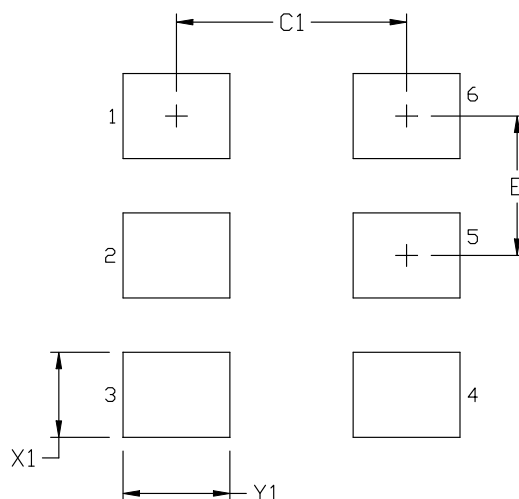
Si540 (5×7 mm) PCB Land Pattern
